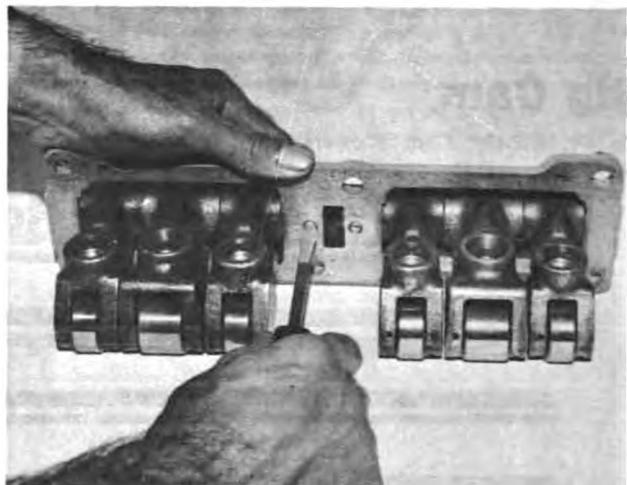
(N10401). Remove The Lockscrew From The Shaft.
